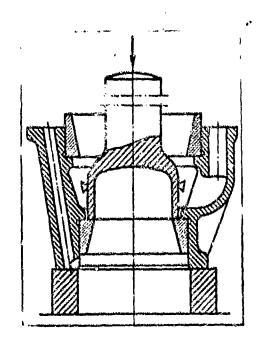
Pressing the outer bearing race from the bevel pinion gear carrier
